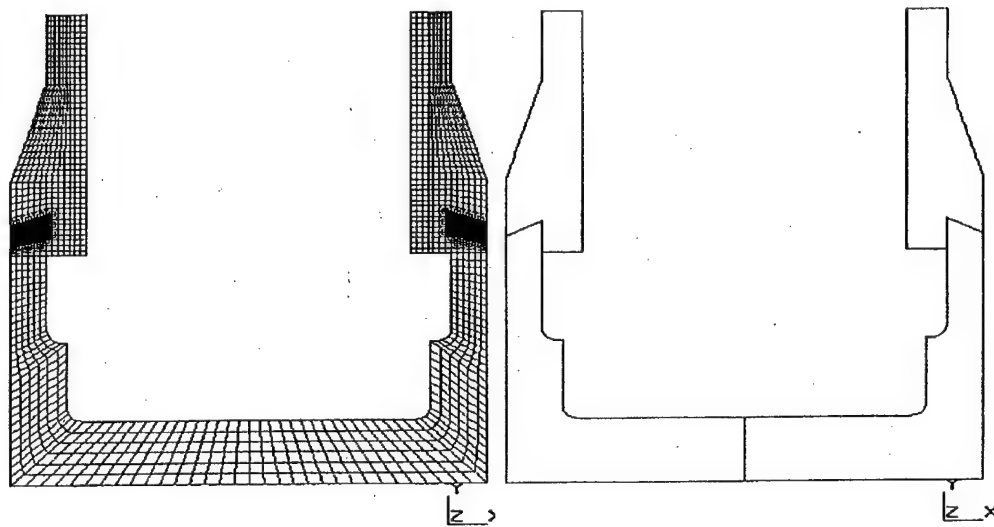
Finite Element Model of Weld Joint with a -30° Scarf Angle
